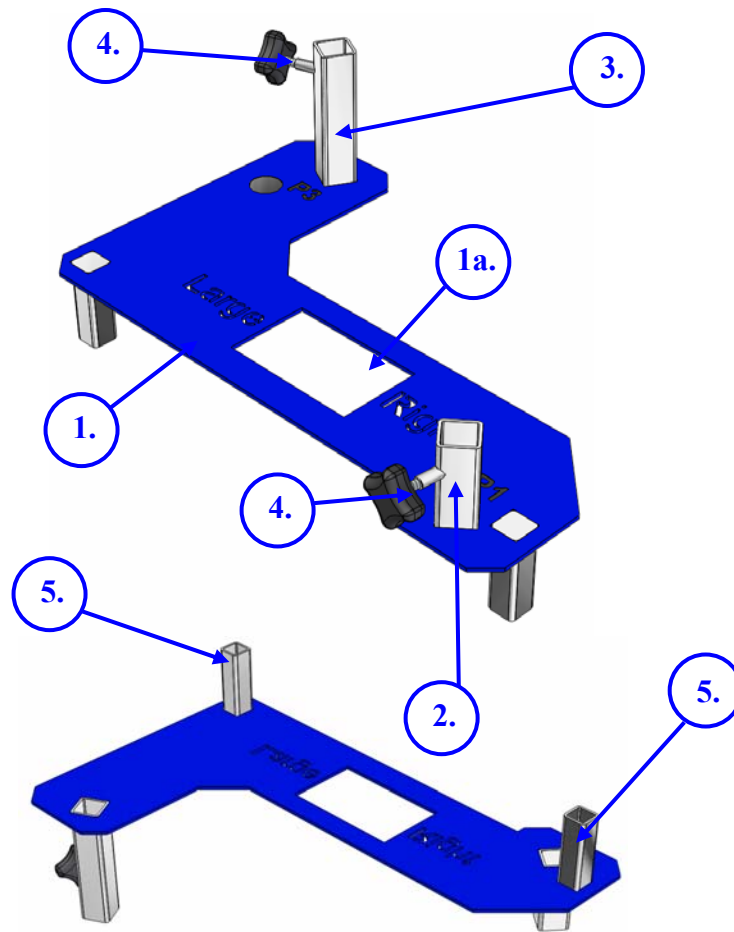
Structure of the L size orthosis holder plate. (Top and bottom views)
